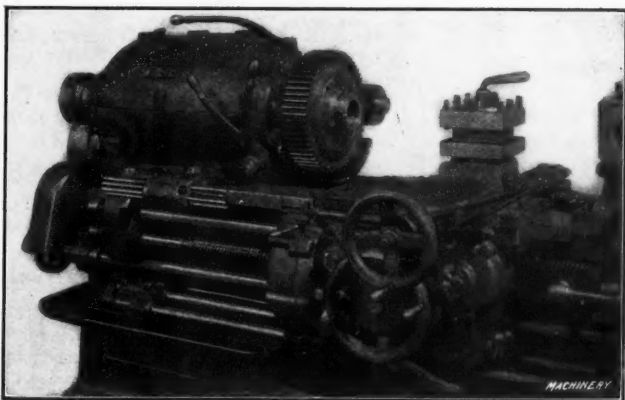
Machine shown in Fig. 1 (Fifteen Minutes Later) with Collet Chuck removed
